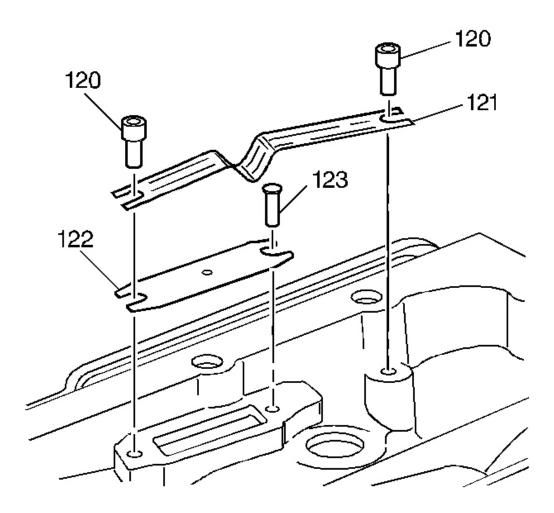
Removing Thermo Element Courtesy of GENERAL MOTORS CORP.
